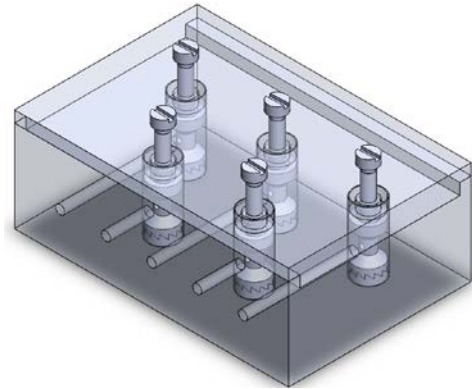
Gen 1 Tensioning Mechanism; Isometric View
